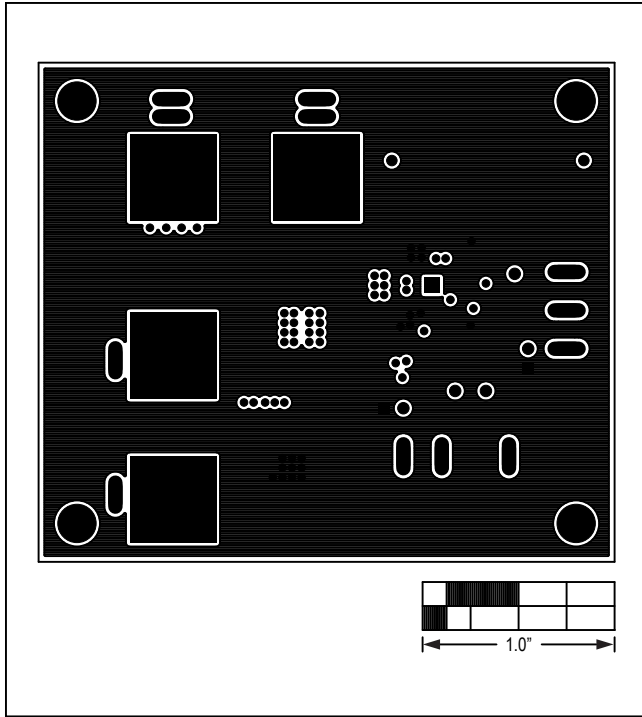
MAX16962R EV Kit PCB Layout—SGND Layer 3
